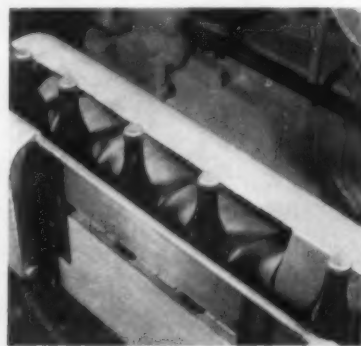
Nylon conveyor screw for bottling machine is centrifugally cast
